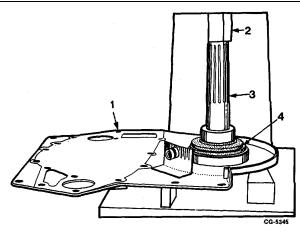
Front Cover Oil Seal Removal with Cover Removed Using SE-1905 Handle and 3-1/4" O. D. Disc
